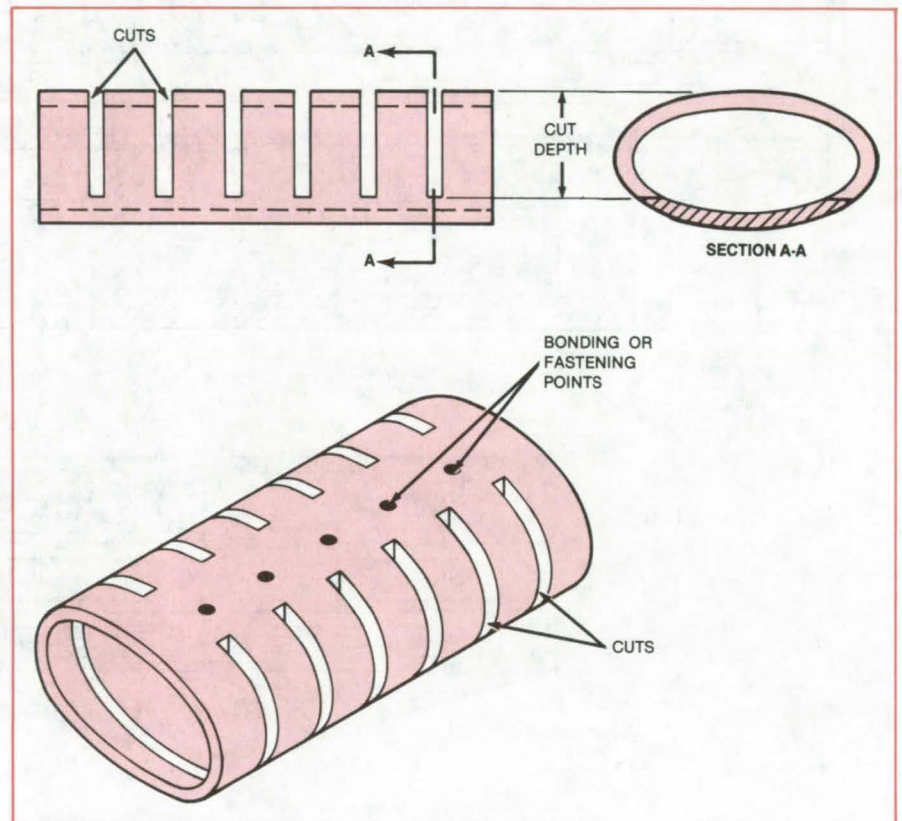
A Set of Hoop Springs is formed from a tube of elliptical cross section by cutting most of the way through the tube at numerous planes perpendicular to the axis. The tube can be made by a variety of methods and in a variety of materials, the choice depending on considerations of cost, weight, fire retardancy, and mechanical properties.
